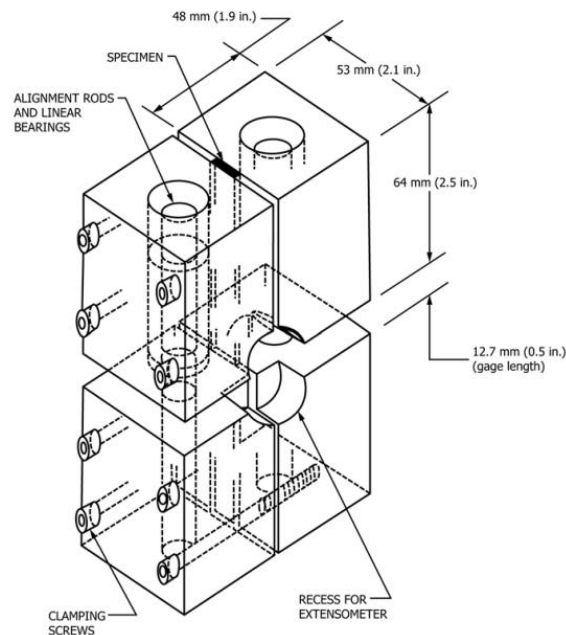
ASTM Recommended CLC Test Fixture [34]
